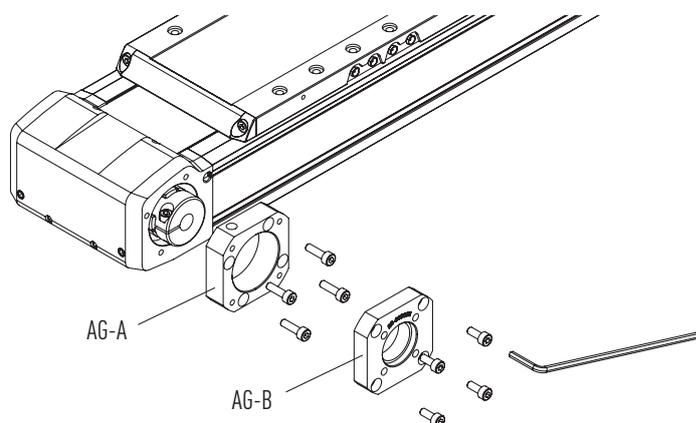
Mounting the two-part gear adapter plate AG-A and AG-B – HT100B
